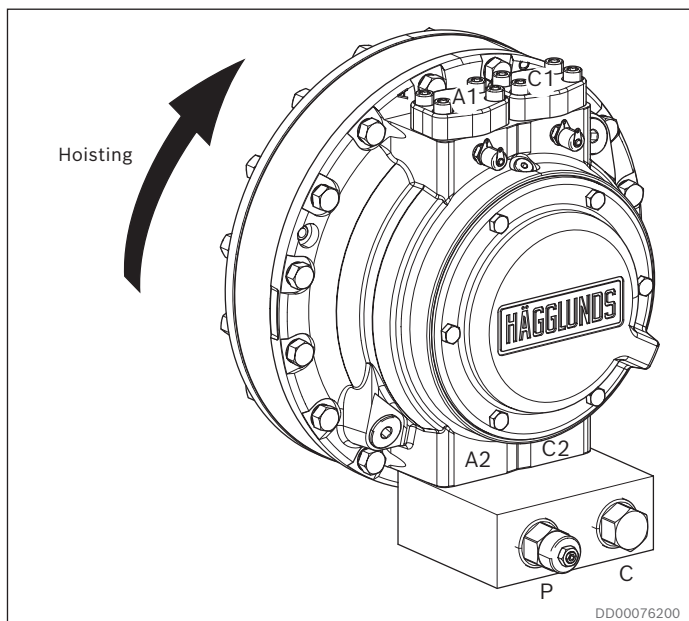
Example CA configuration C: High pressure in P valve / A2 motor (Hoisting), motor shaft rotating counter clockwise viewed from the motor shaft side. Lowering in C valve / C2 motor port
